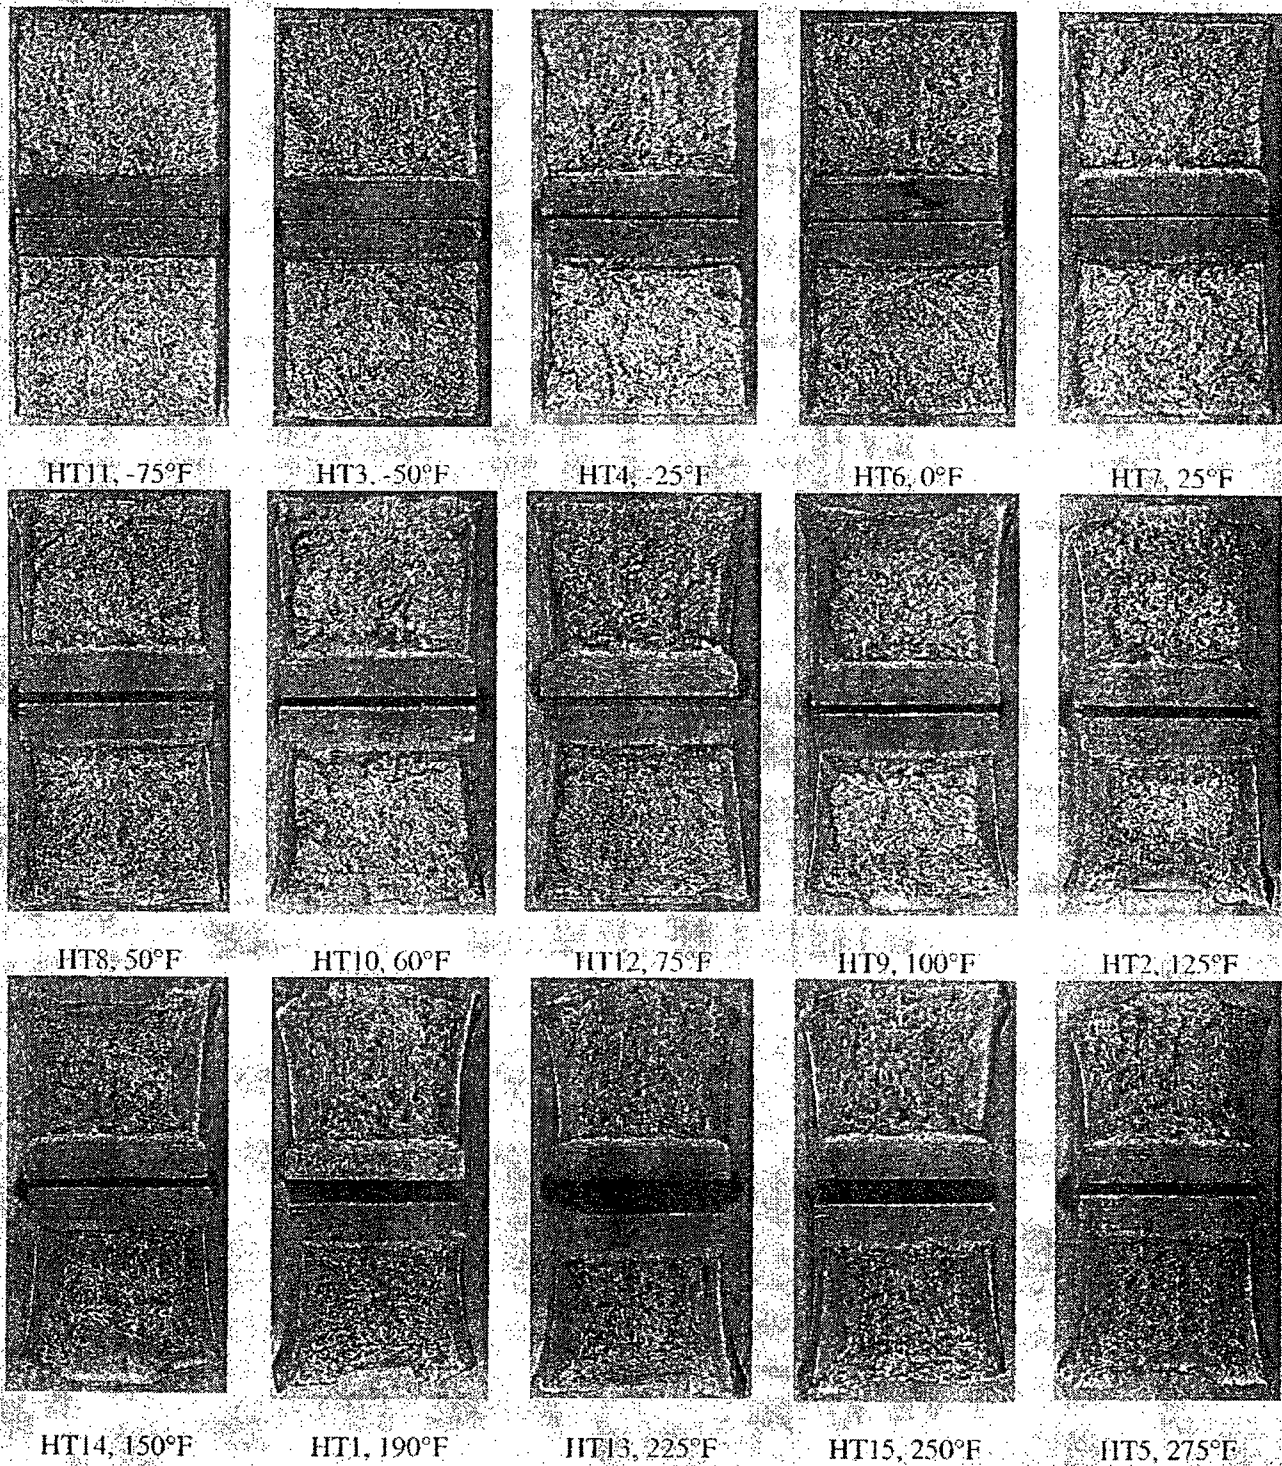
Charpy Impact Specimen Fracture Surfaces for South Texas Unit 2 Reactor Vessel Intermediate Shell Plate R2507-1 (Transverse Orientation)
